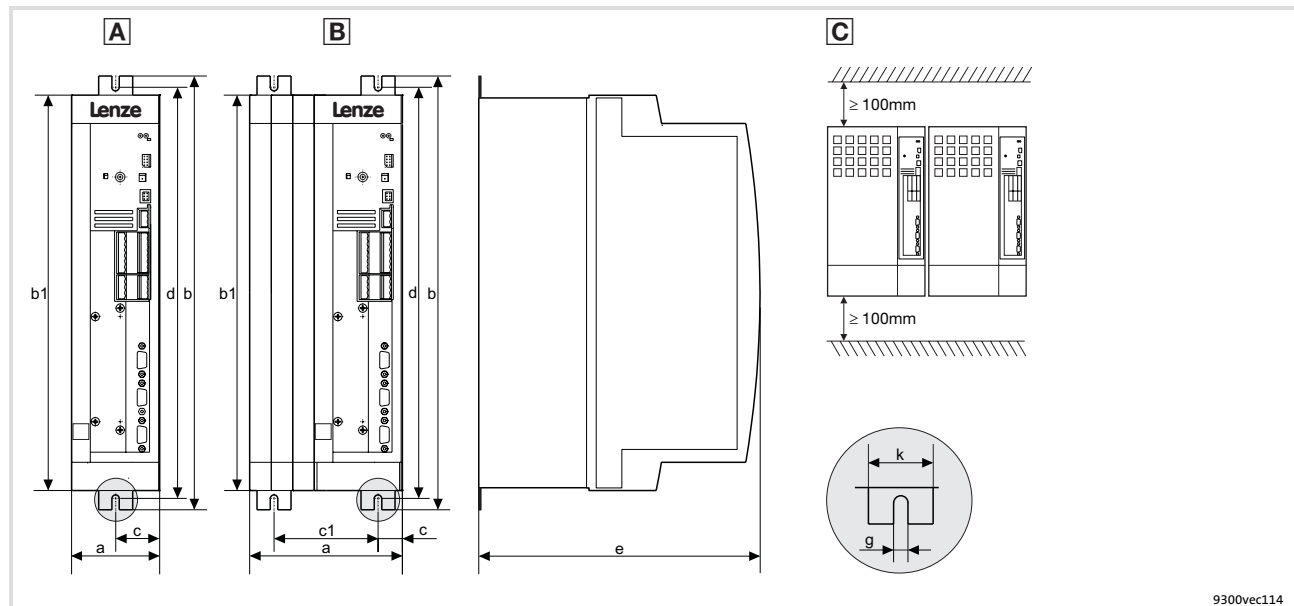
Standard mounting with fixing rails 0.37 ... 11 kW
